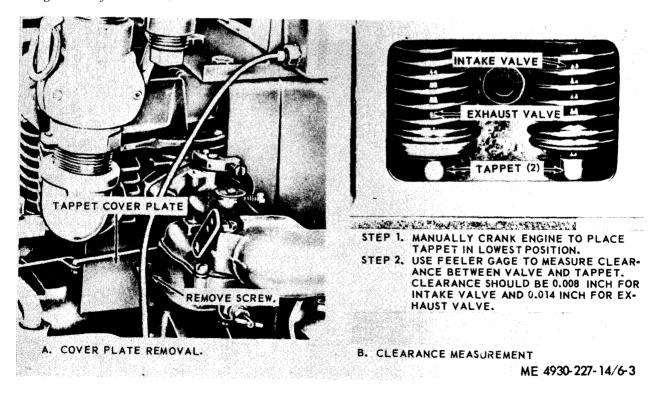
Tappet cover plate, removal, installation, and clearance measurement.
